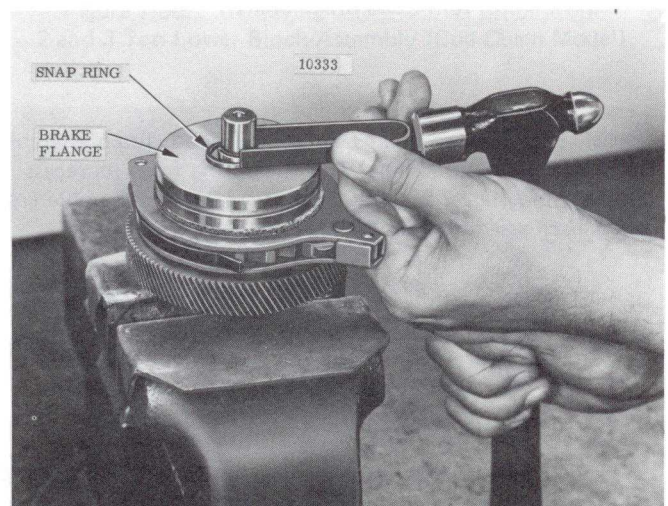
Removing Snap Ring from Load Brake Shaft
